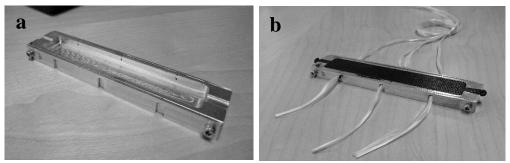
a) Aluminum mold for rubber casting and b) vulcanized aramid/rubber composite piece.
